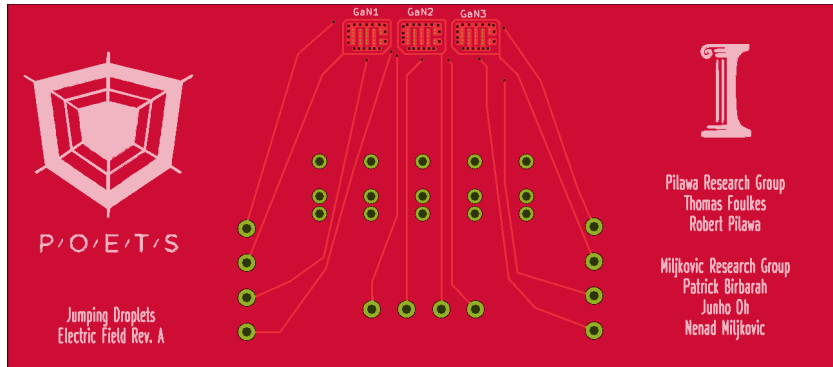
PCB artwork for drill locations and for the front copper, front mask, and front silk layers of revision A.
